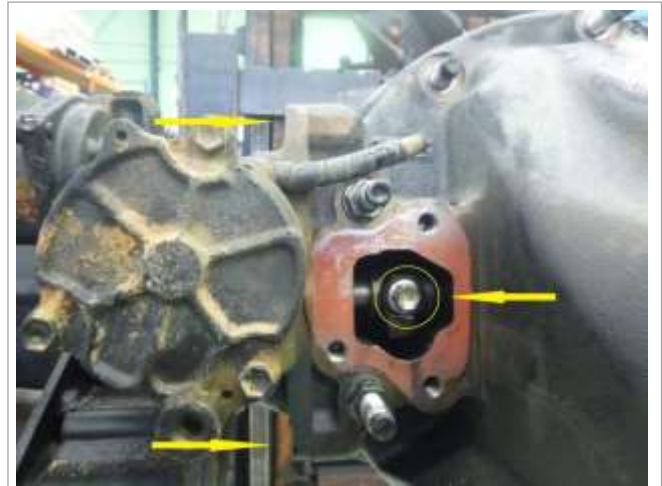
Shaft Bolt To Be Removed & Actuator Bolts
